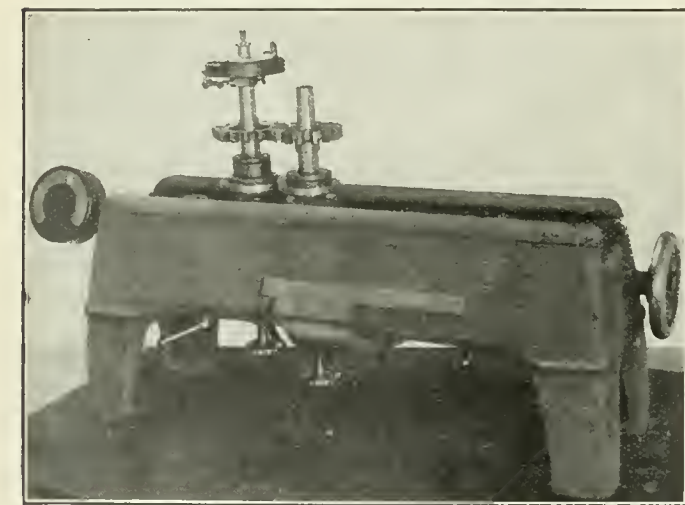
THE SAURER GEAR-TESTING MACHINE
